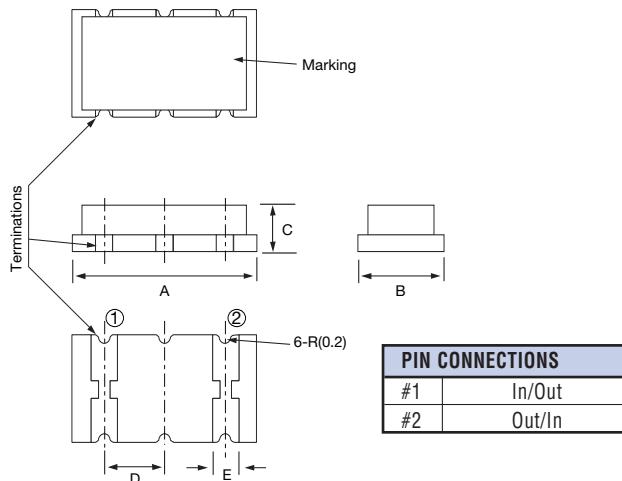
ECS-SR-A Series - Top, Side, Bottom & End views
